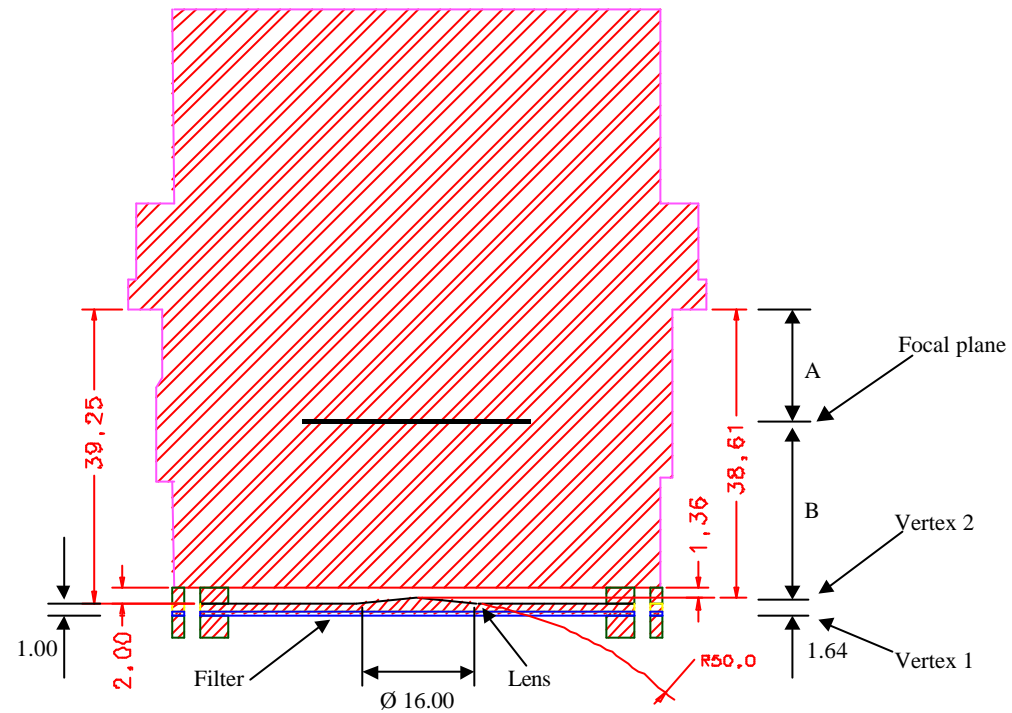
Dimensions of spectrometer lens – filter – detector assembly.
